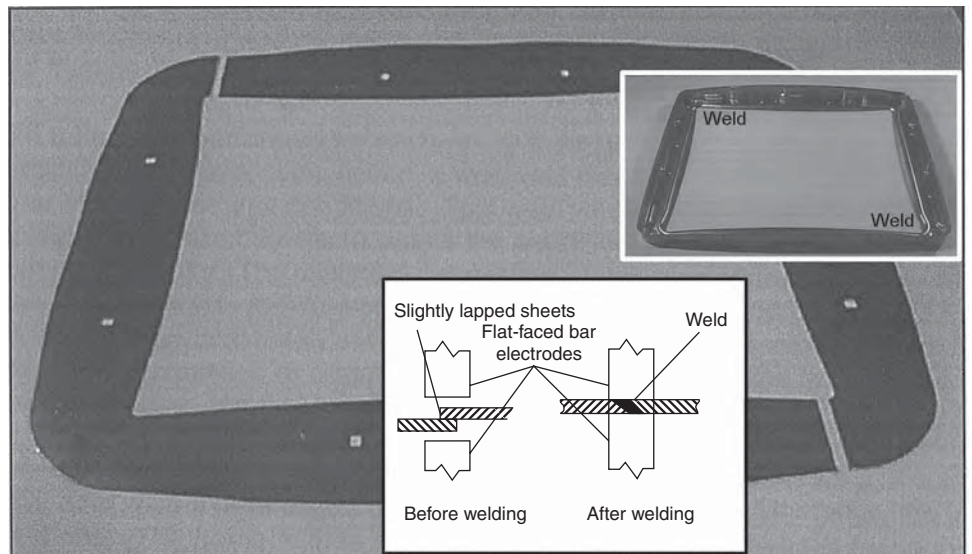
Example of resistance mash weld. This application used flat-faced bar electrodes. Courtesy of Edison Welding Institutel
